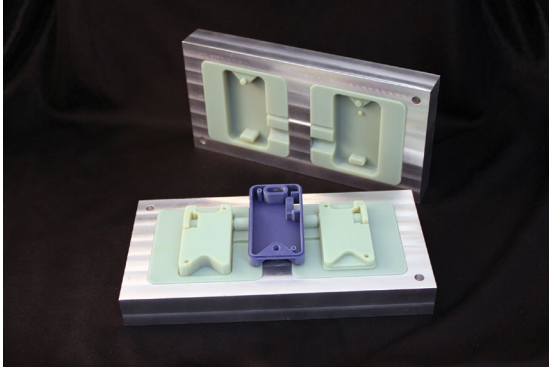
3D printed injection molding inserts created by the AMPrint Center staff in partnership with a local company.
